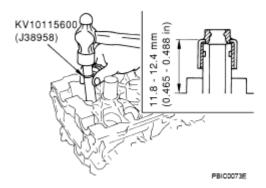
Installing Valve Oil Seal Courtesy of NISSAN MOTOR CO., U.S.A.
